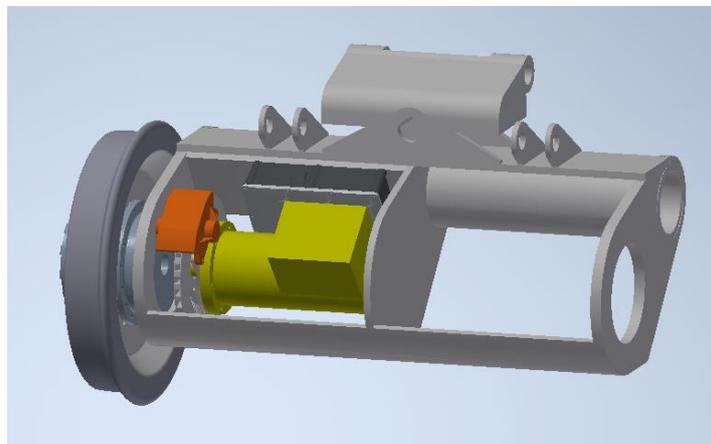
Motor and drive unit mounted to an axle. The inverter can be seen behind the motor.
